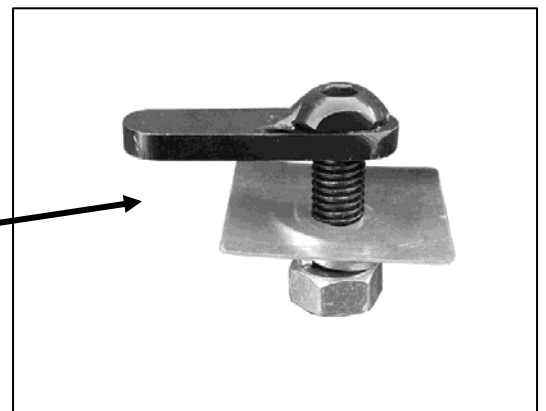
B) Large M10 x 30mm T-Bolt for driver and passenger side outer location on front brackets only
